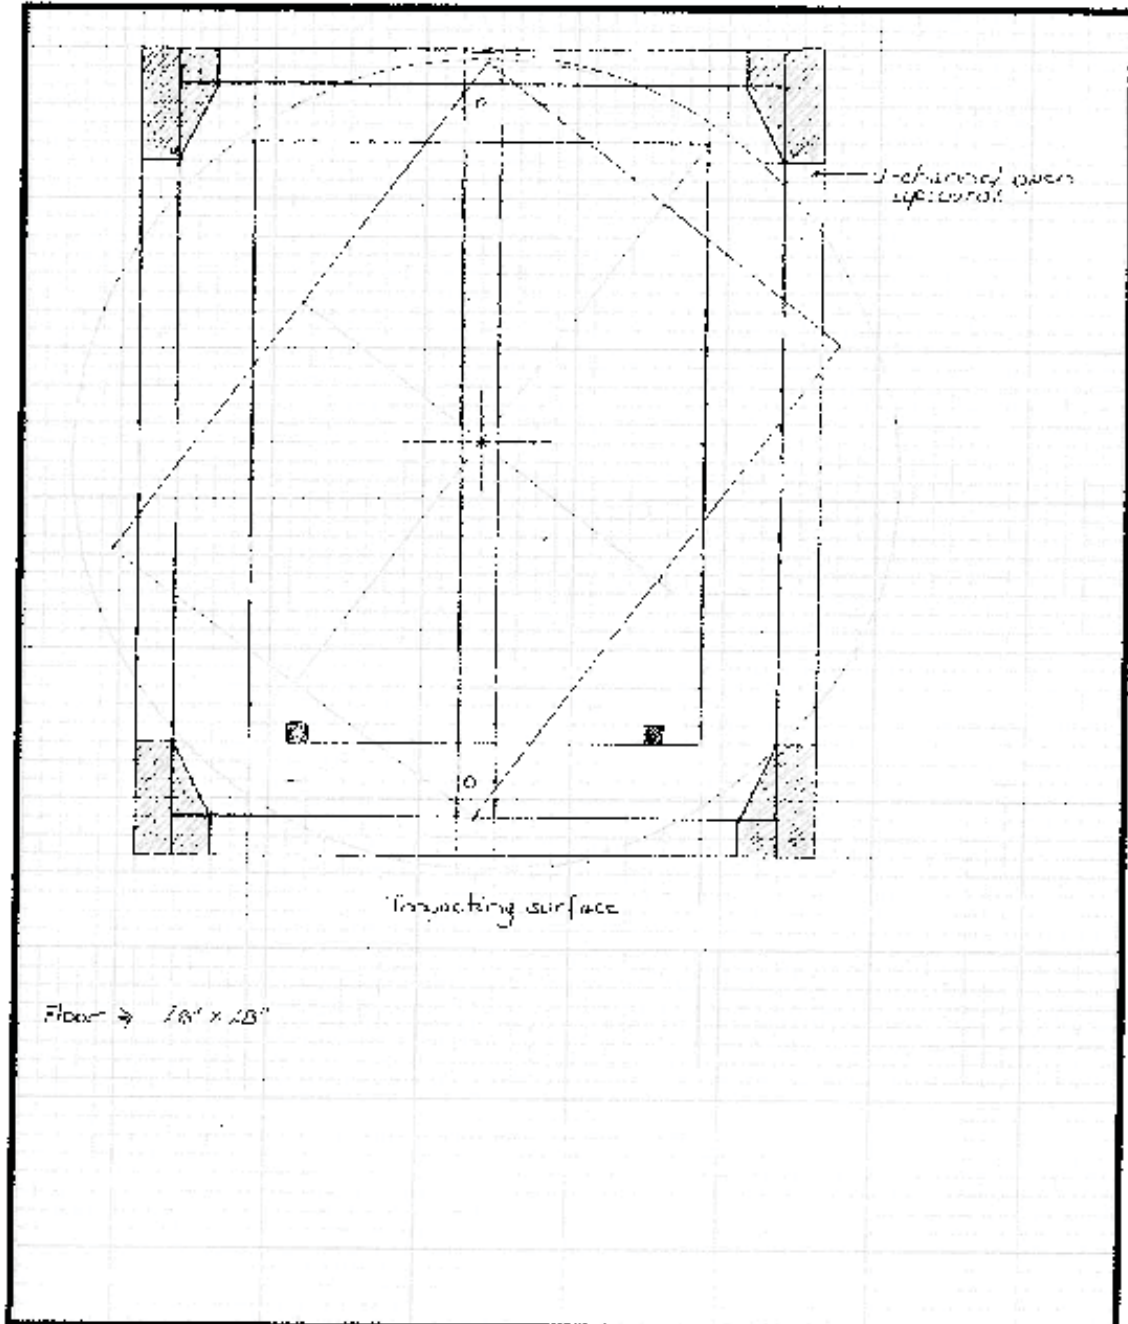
Dimensional drawing of the turntable assembly of the occupant compartment floor
